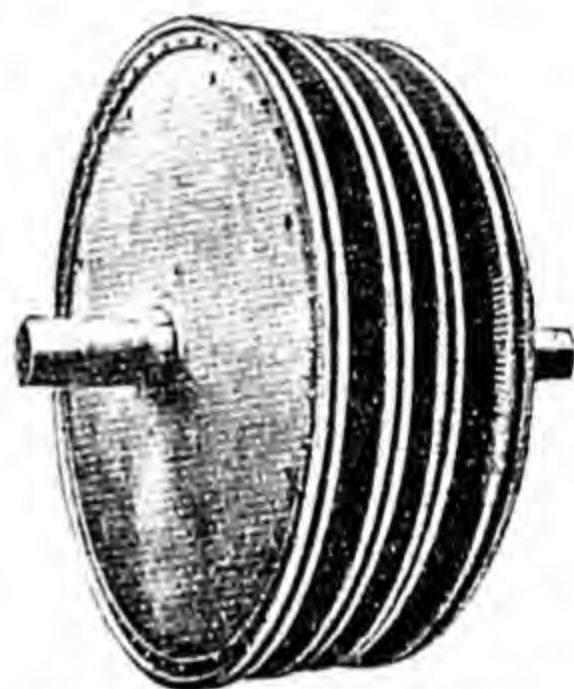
Set of wheels for a four-stage Curtis steam turbine.
